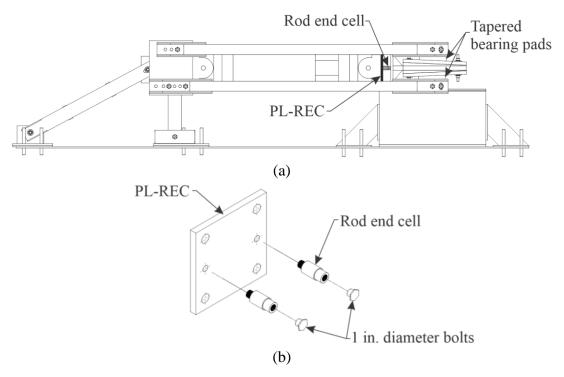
Rod end cell assembly: (a) Location of rod end cell in the test setup; (b) Exploded view of rod end cell assembly
